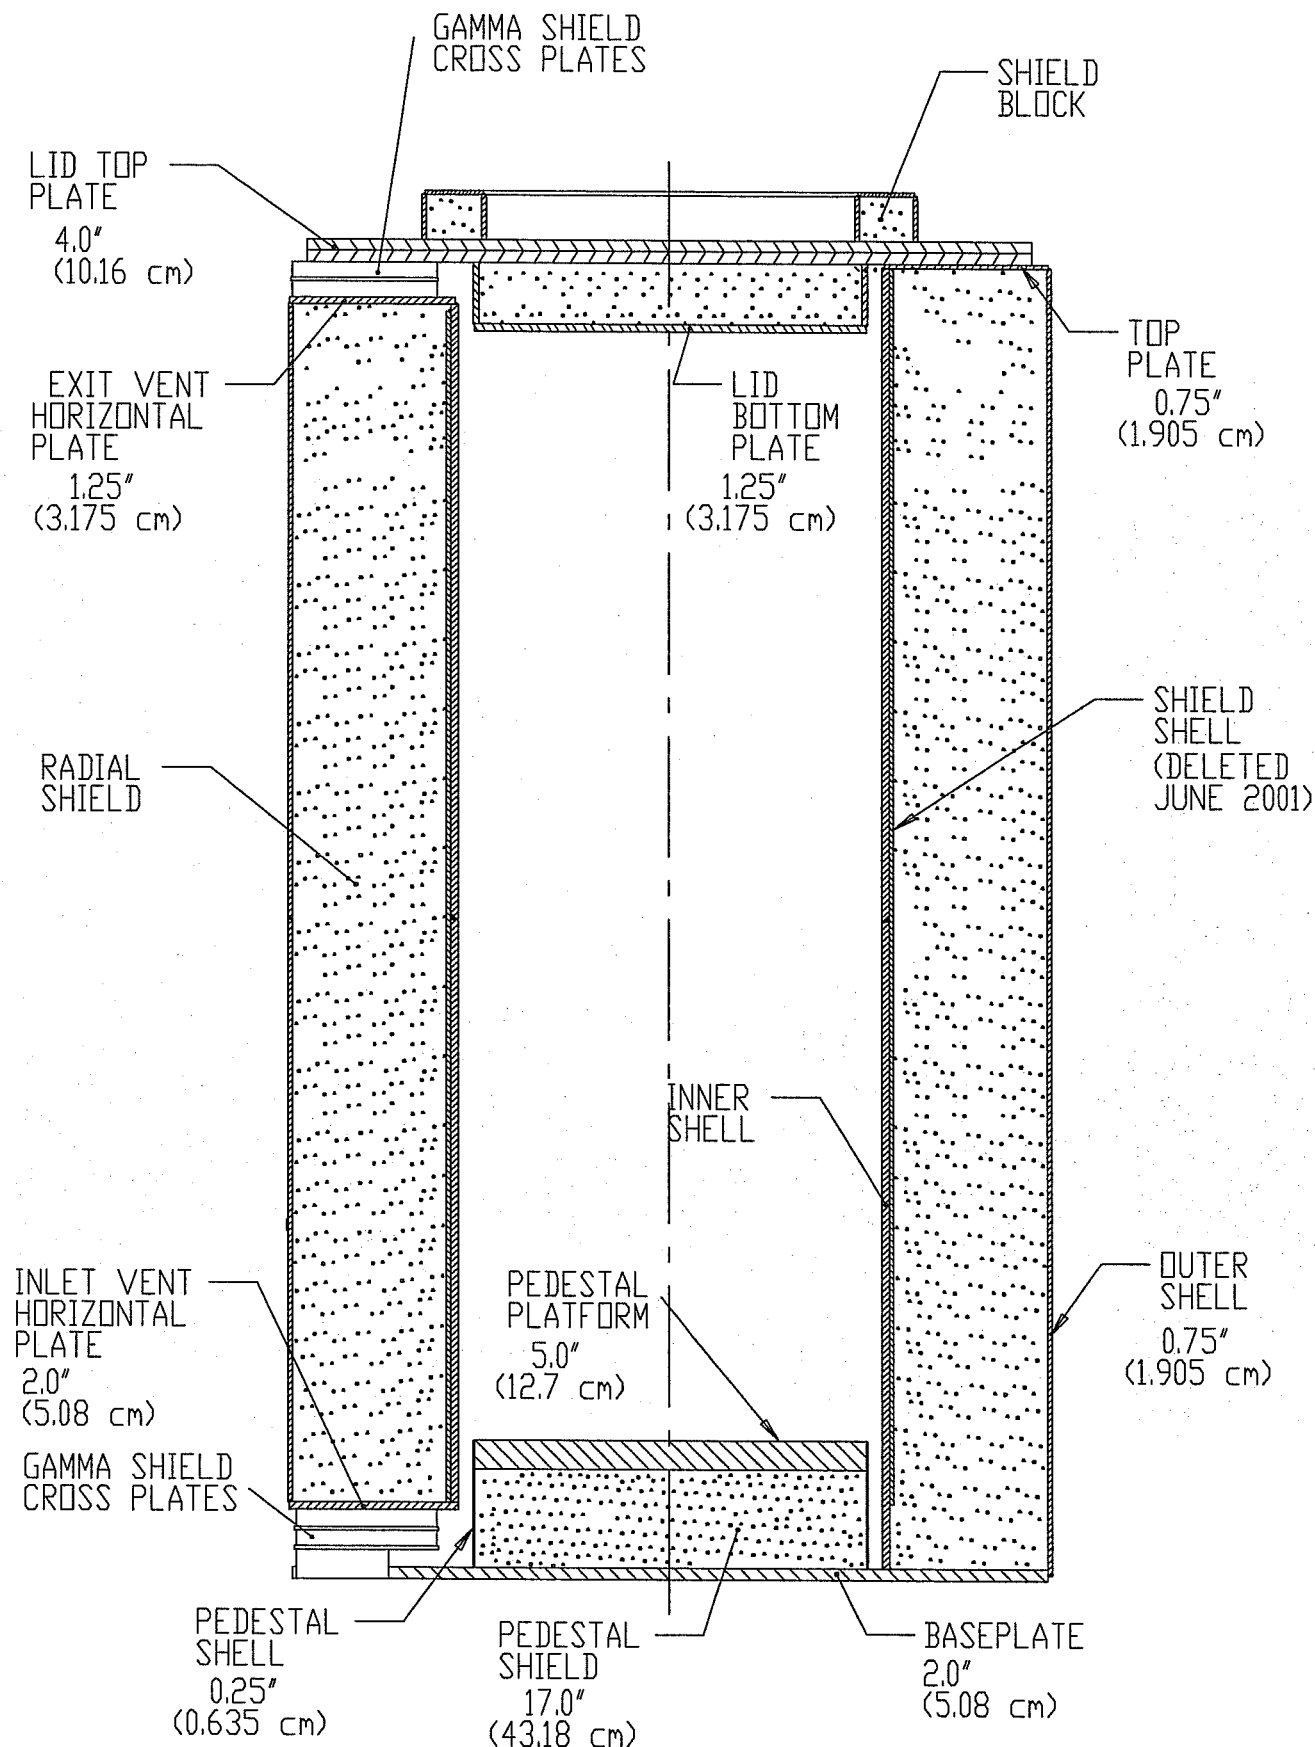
; HI-STORM 100 OVERPACK CROSS SECTIONAL ELEVATION VIEW
